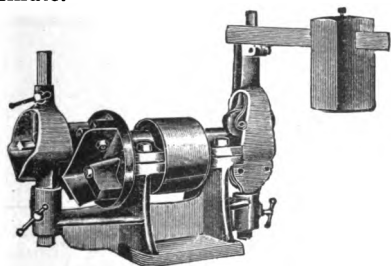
NO. 1 ACME ROD MACHINE. (Hand Feed.)
